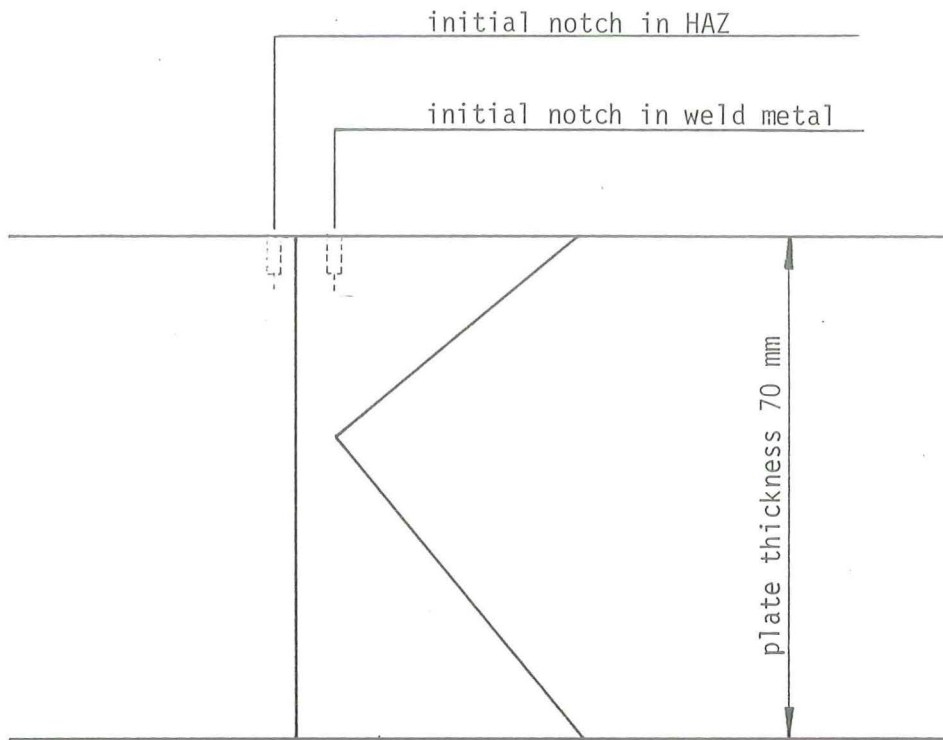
Positioning of initial notch in specimens for experiments on crack growth in HAZ and weld metal
